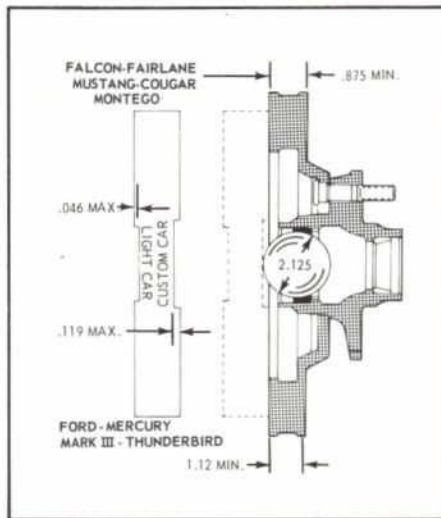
Floating Caliper Rotor Refinishing Limiting Dimensions
